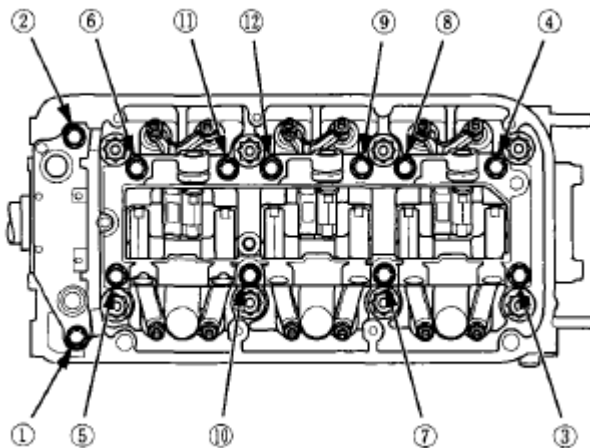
Identifying Bolts On Rocker Arm Assembly (Front) With Loosening Sequence
